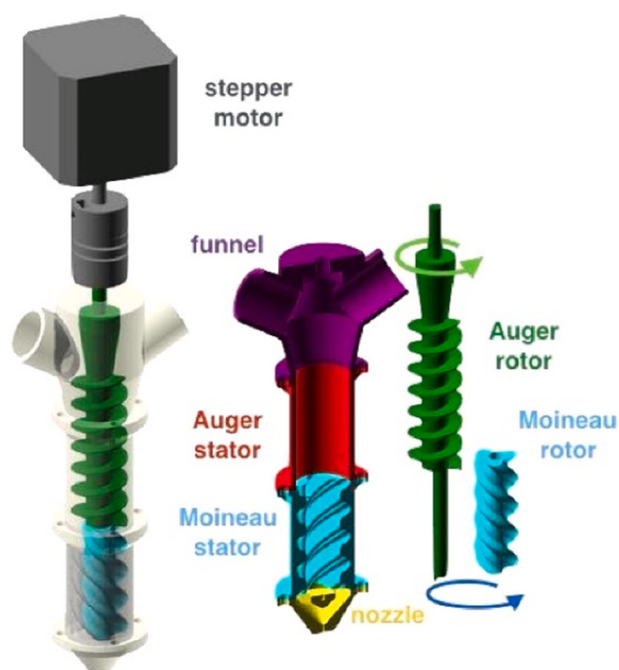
Schematics of a pellet extruder, combining together Auger and Moineau screws [38].
